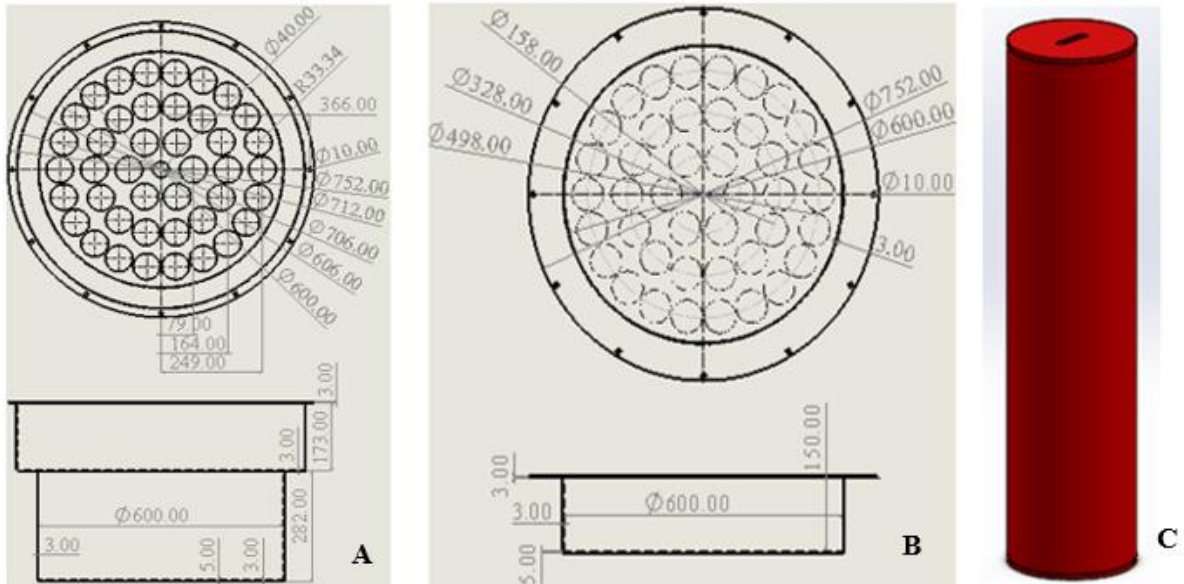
(A) Container base (B) container top (C) PCM tube
